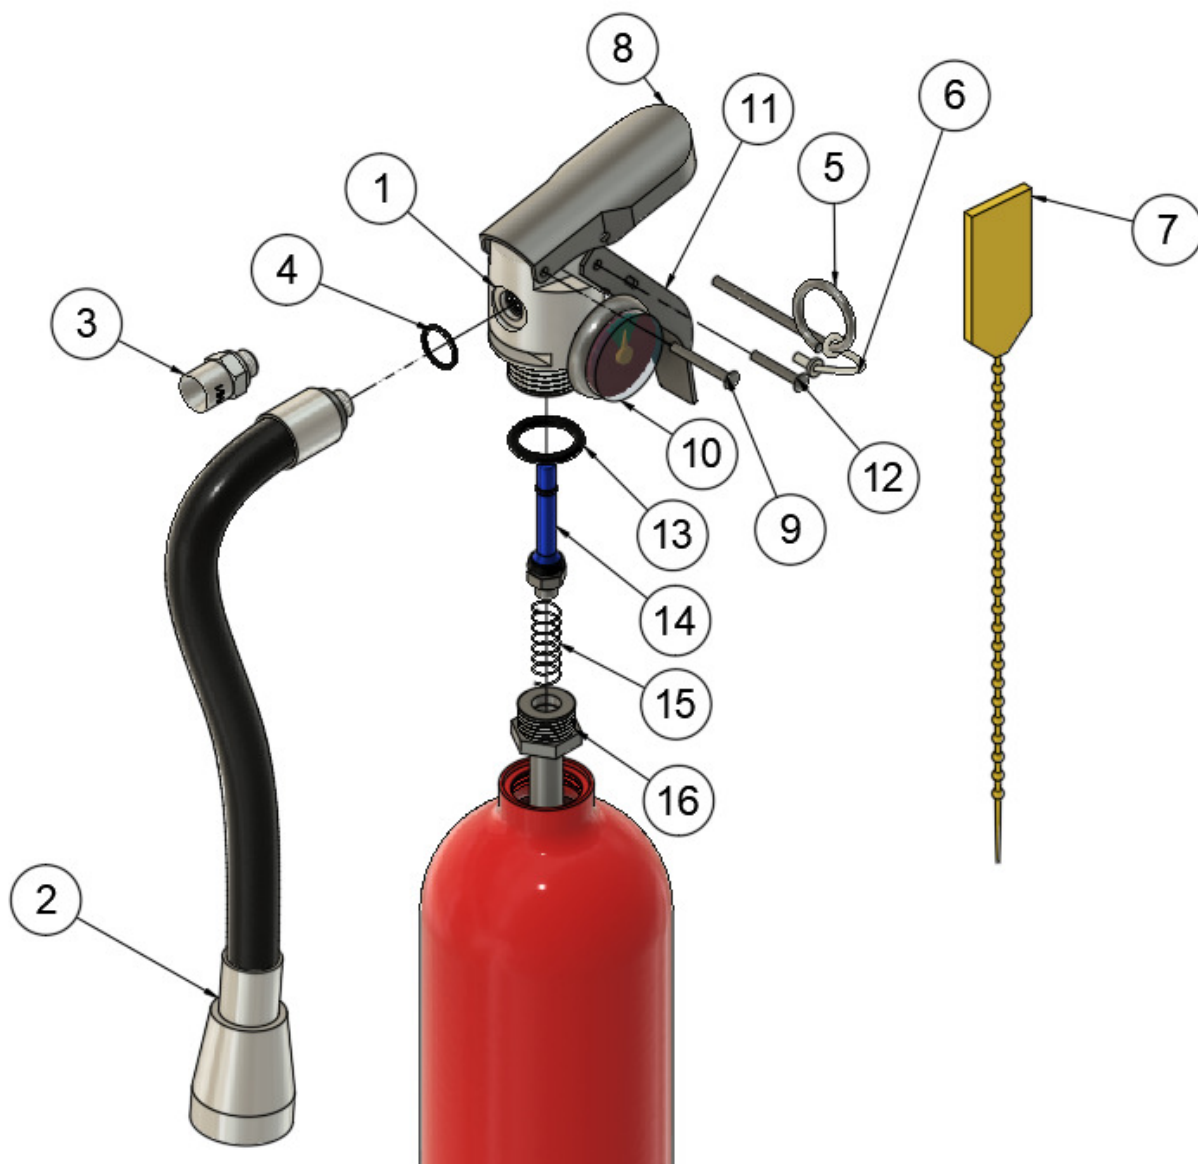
H673 & 375N69953 Fire Extinguisher Assembly
